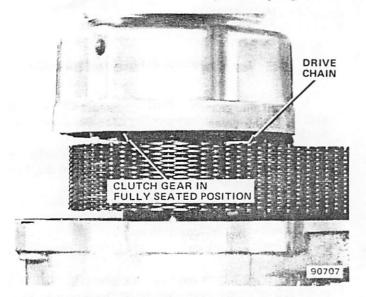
D-67 Seating Viscous Coupling on Clutch Gear
